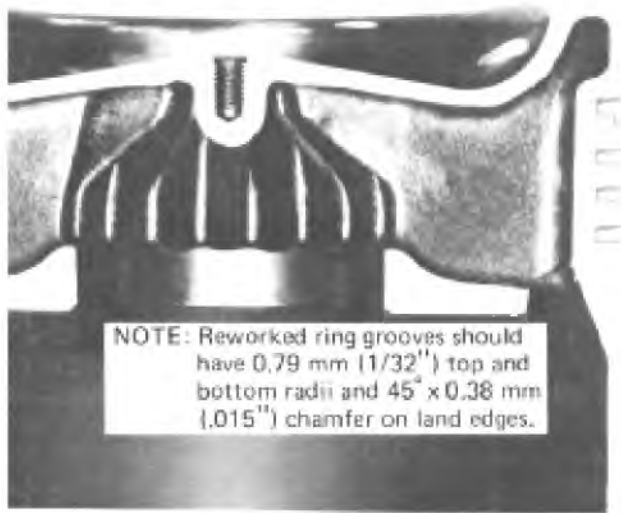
Typical Piston Ring Groove Wear Step
